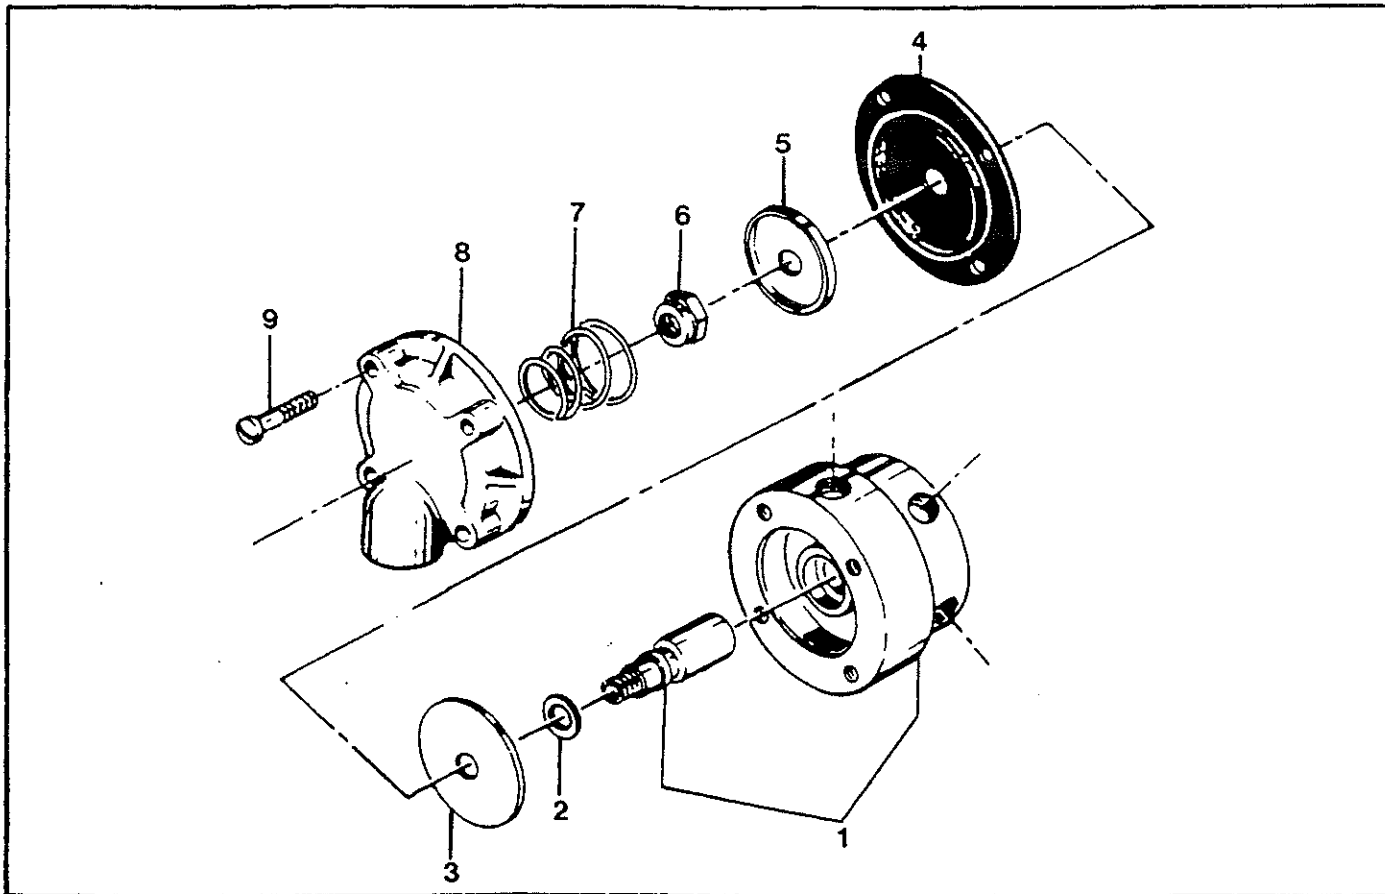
FUEL MANIFOLD ASSEMBLY.
